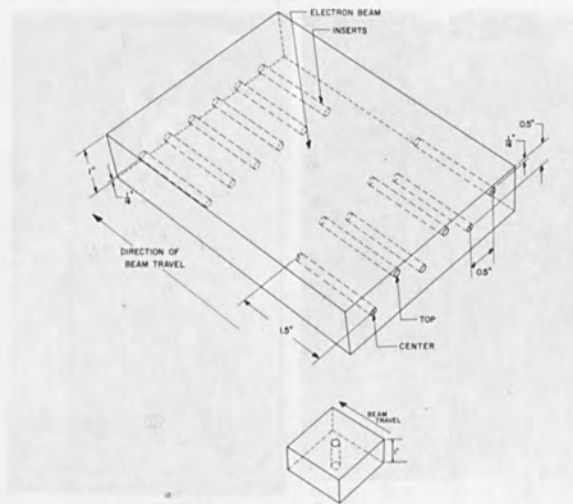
Diagram of weld plates showing insert positions.
